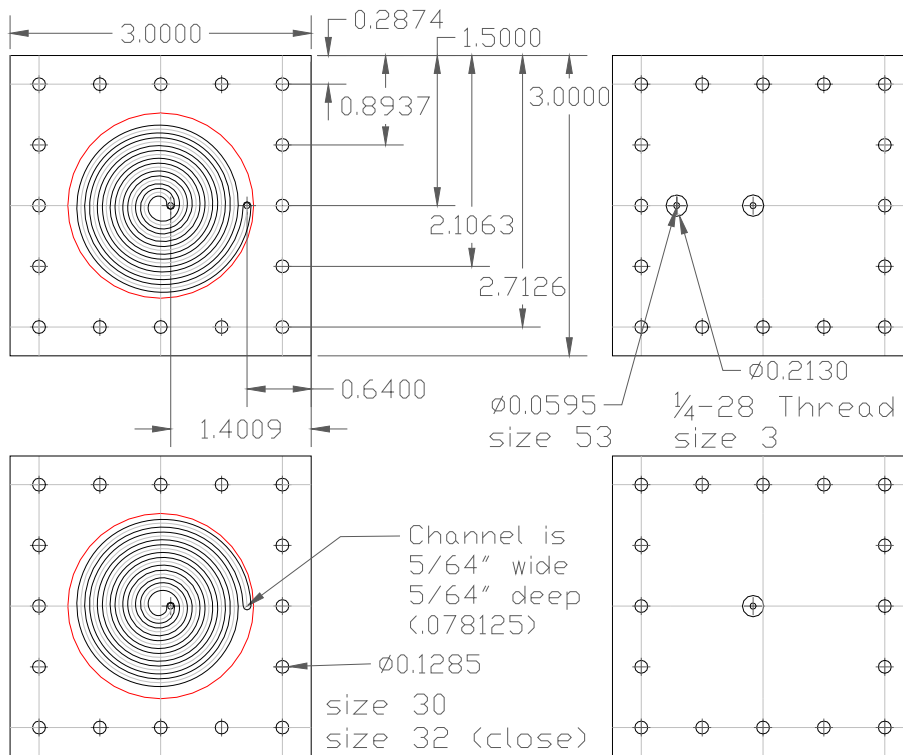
Design 2 drawing. Red circle shows location of membrane. All dimensions given in inches.
